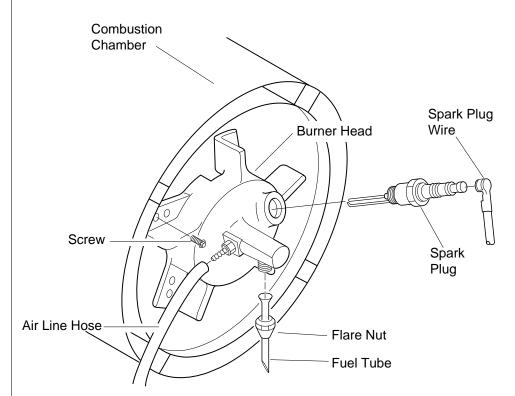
Removing Burner Head, 44 kW (150,000 BTU/Hr) Model
